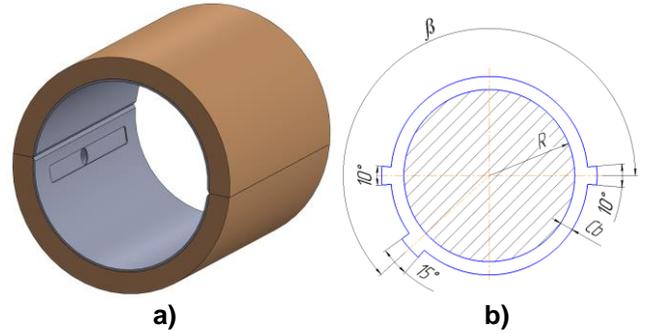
Induction Motor DE Bearing CAD Model (a) and Varying Parameters Scheme (b)
